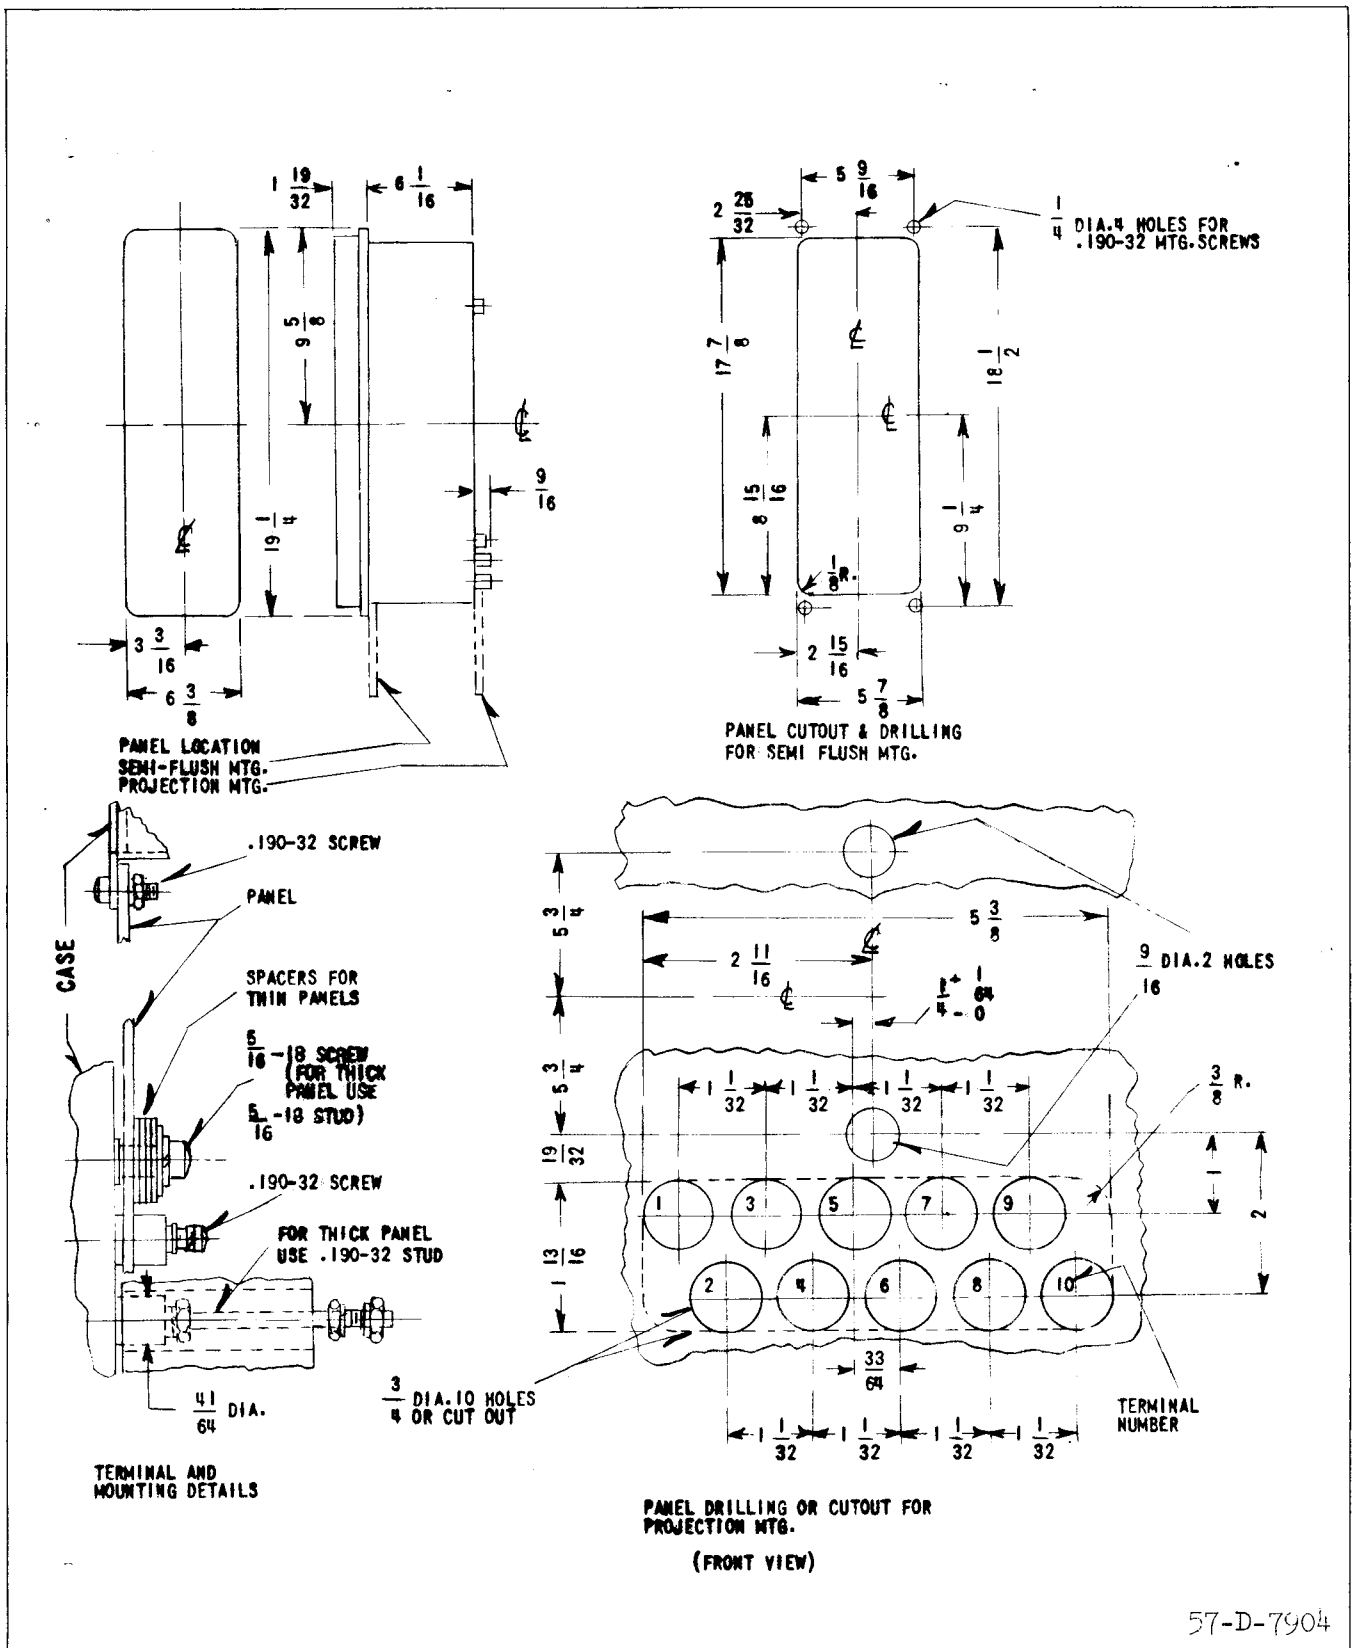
Outline and Drilling Plan for the Type FT41 Case
